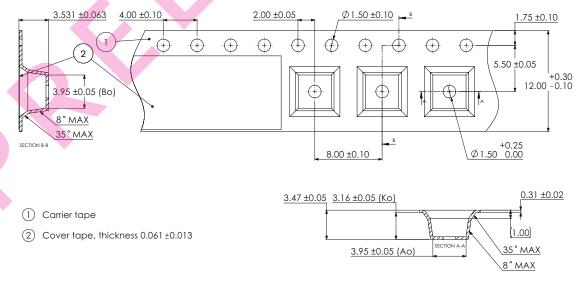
Pocket tape dimensions for L1I0-0XXX060000000.
